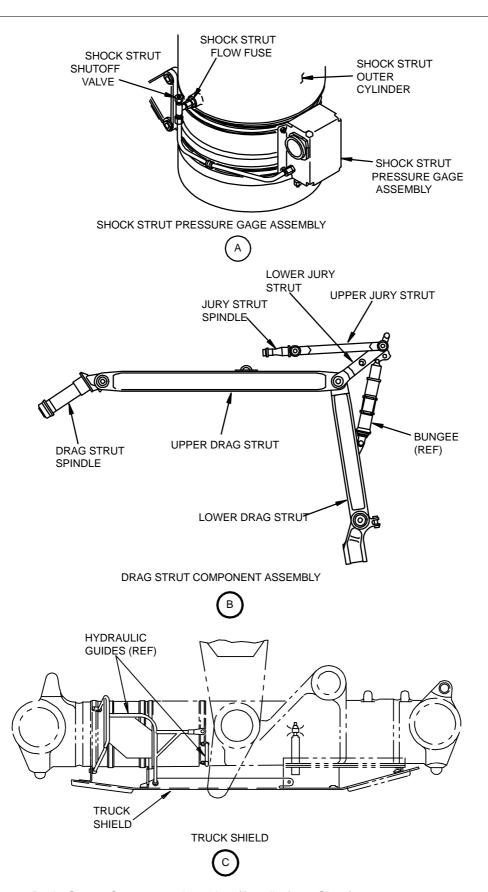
32-13 Body Gear Comp. Index Fig. 101
